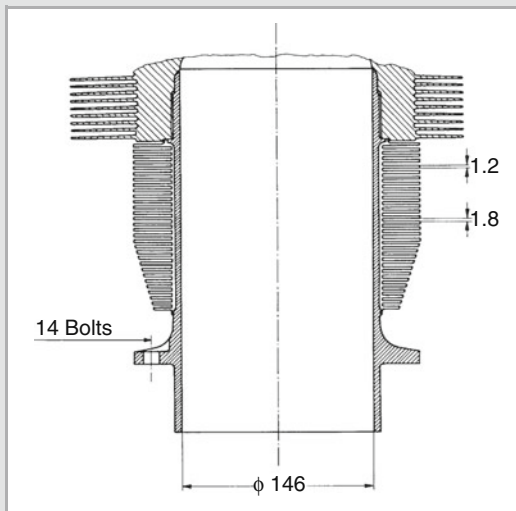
Alfin cylinder barrel of an air-cooled diesel engine (Teledyne Continental engine) [9-28]
